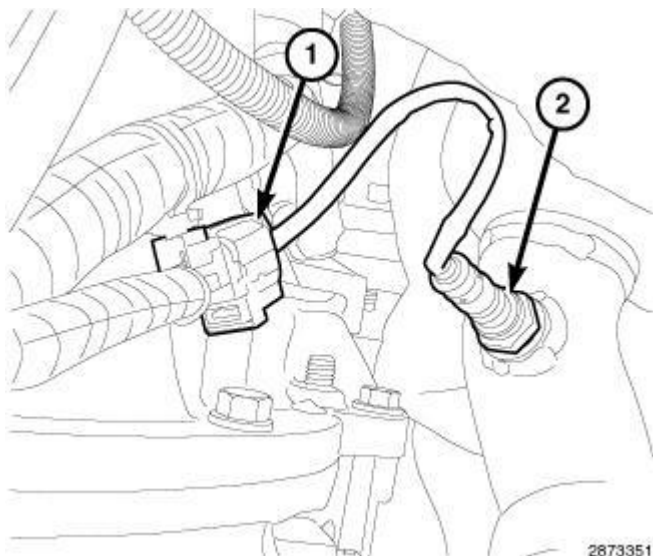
Left Upstream O2 Sensor & Electrical Connector
